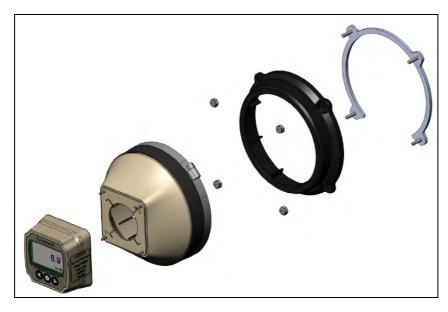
Exploded View of Magnehelic/Photohelic Mounting Adapter
